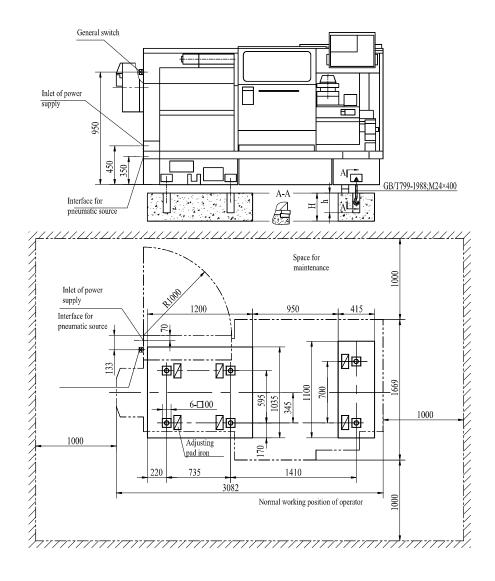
Occupied floor space and arrangement of foundation holes of the main machine
